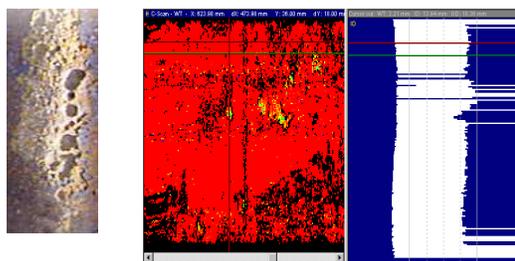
A One millimeter diameter Pitting Corrosion detected and sized by an RD-Tech IRIS system
